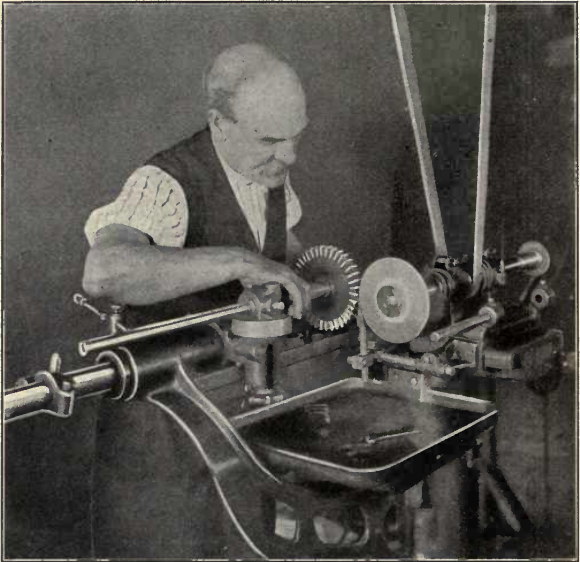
Grinding the peripheral teeth of a milling cutter on a Brown & Sharpe cutter grinding machine.
